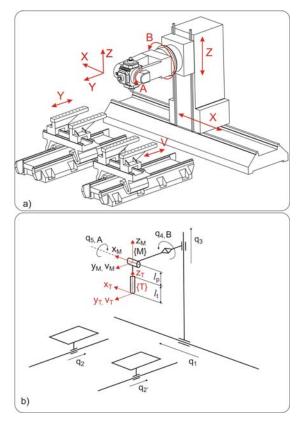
Multi-axis wood CNC machining center Bacci MX6
